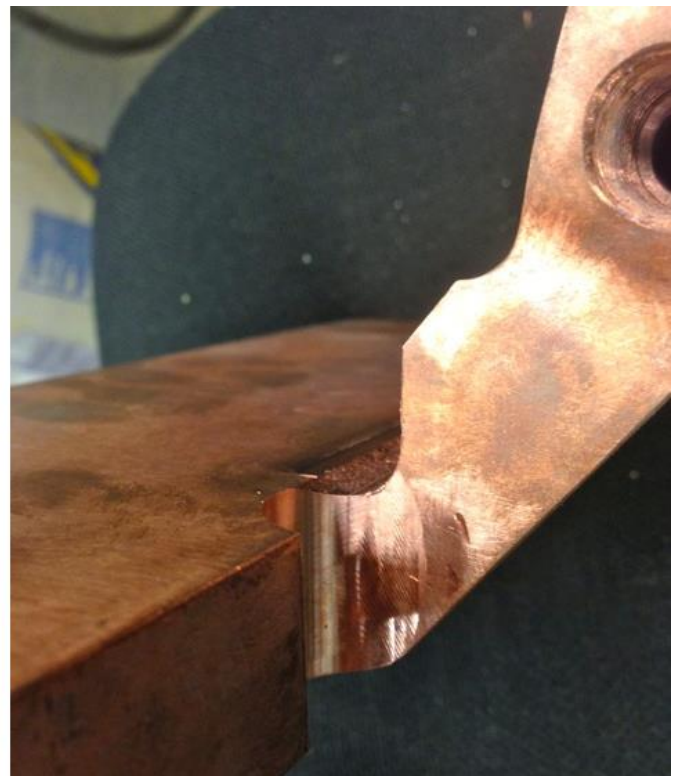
4 Type “C” After Weld Clean-Up
